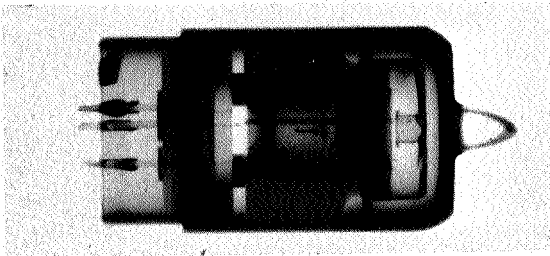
Radiograph of Electron Gun Design No. 2 taken after impact tests. Assembly damage included cracked heater ceramic; deformed cathode cone support; and deformed anode electrode (not visually detectable).
